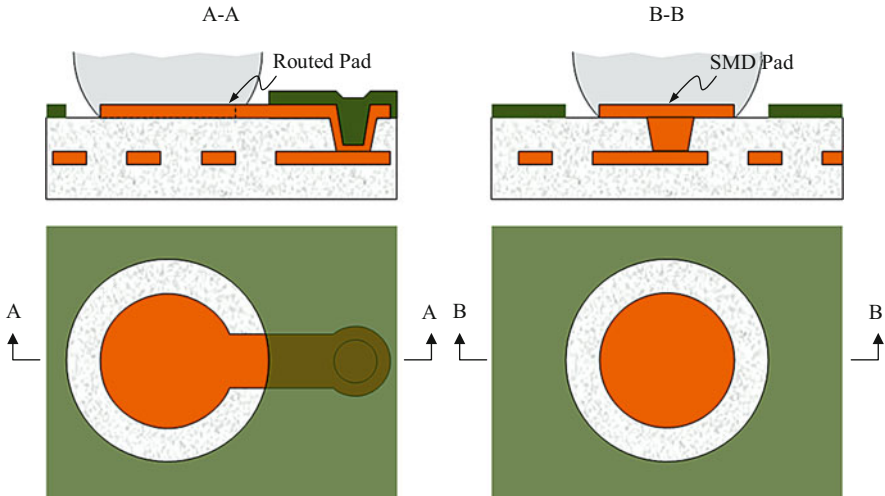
Cross-sectional view and top view of routed PCB copper pad and via-in-pad PCB copper pad. Filled copper via is desired in the via-in-pad design
